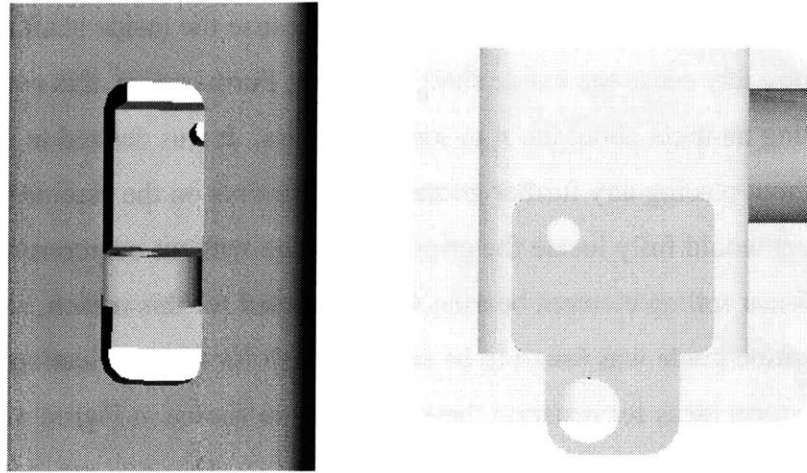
First embodiment of gripper motion guide. At left, back view. At right, top cross-section view.
